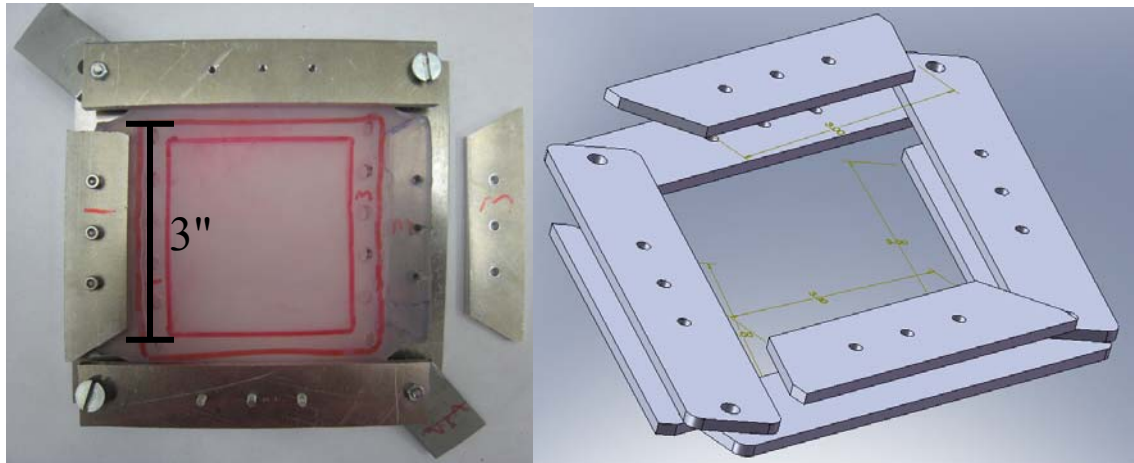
(a) SMP sample inside pre-tensioning fixture (ignore the outer red square line) and (b) SolidWorks drawing of pre-tensioning fixture assembly
